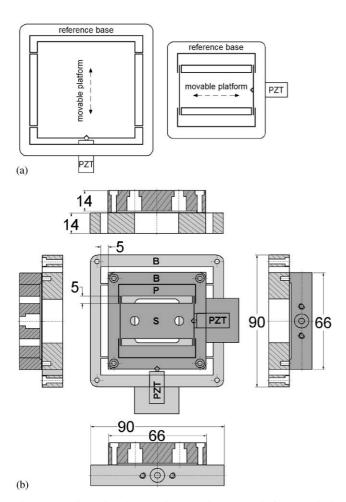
Two-dimensional translation stage is composed of two stacked single-axis flexure stages. (a) The simplified drawing of two flexure stages. The bold lines shown in the figure are machined by using wire EDM (electric discharge machining), and the arrows represent the moving directions. (b) The detailed dimensions of the stacked flexure stage. The upper is the double compound leaf-spring flexure stage, and the bottom is the double leaf-spring flexure stage (B: Base, P: Primary stage, S: Secondary stage).
